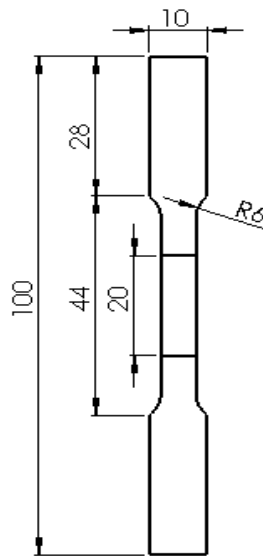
Tensile test specimen with dimensions in mm.
